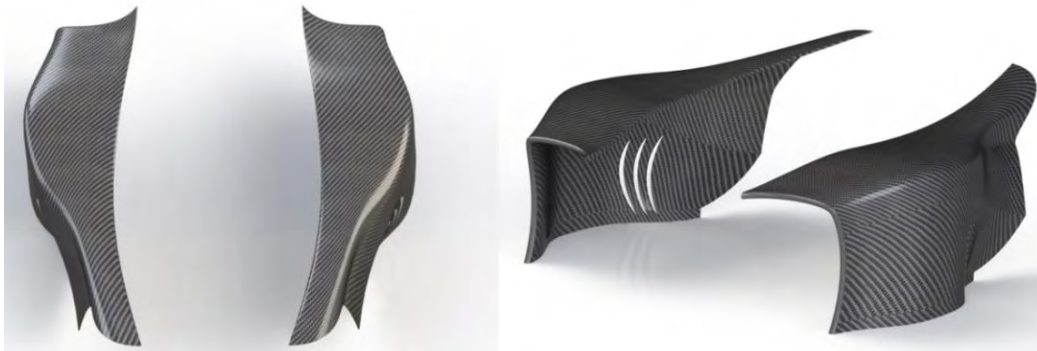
CAD designs of the final type of sidepods with lifted upper surface
